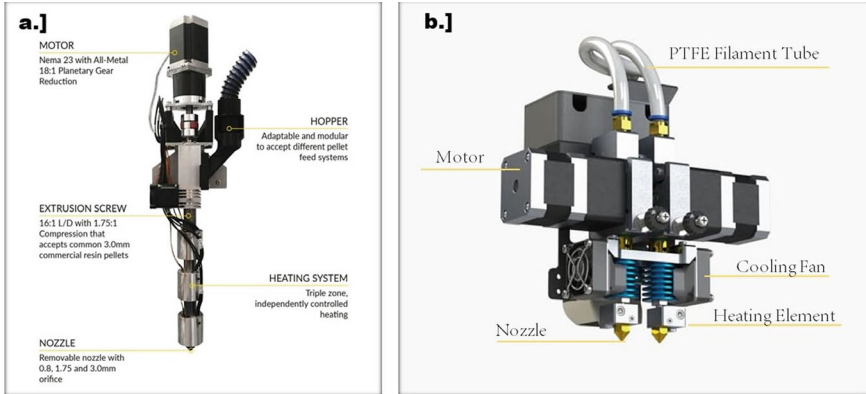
a Pellet extrusion printing head for RA3DP (Little 2020), b filament extruder head for fixed axis 3D printer
